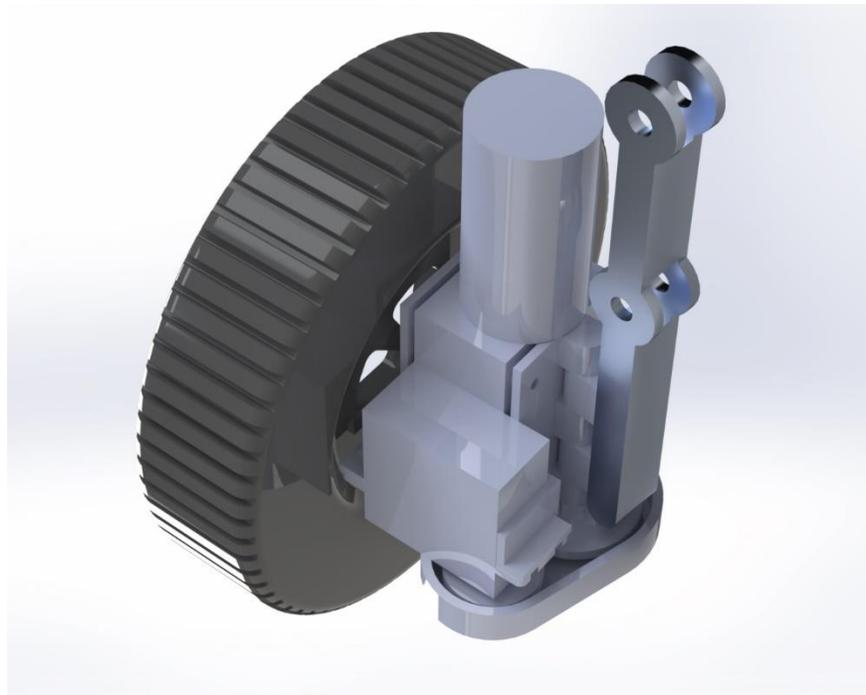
A geared servo motor will be used to steer each wheel, which will each be powered by an independent worm drive motor.
